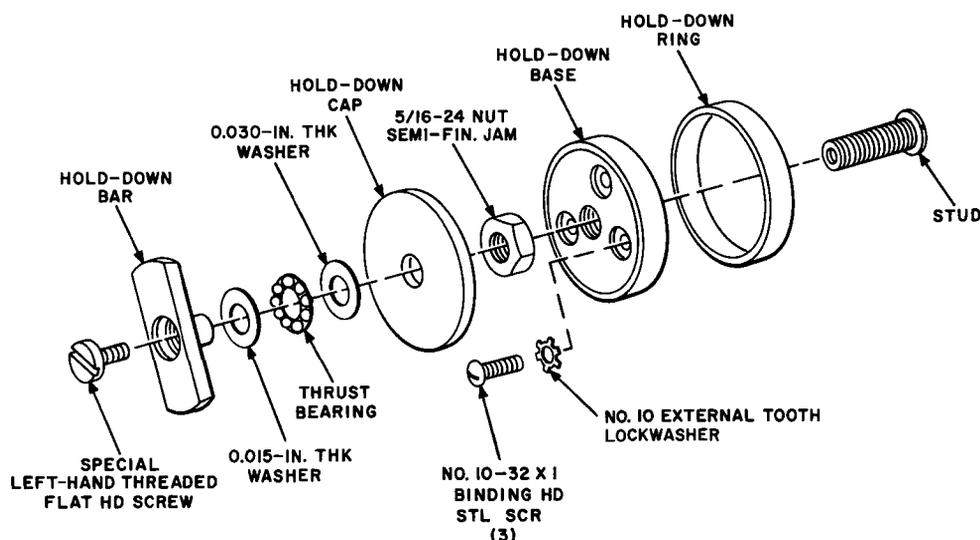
KS-19125, L101 Reel Hold-Down Knob—Exploded View
